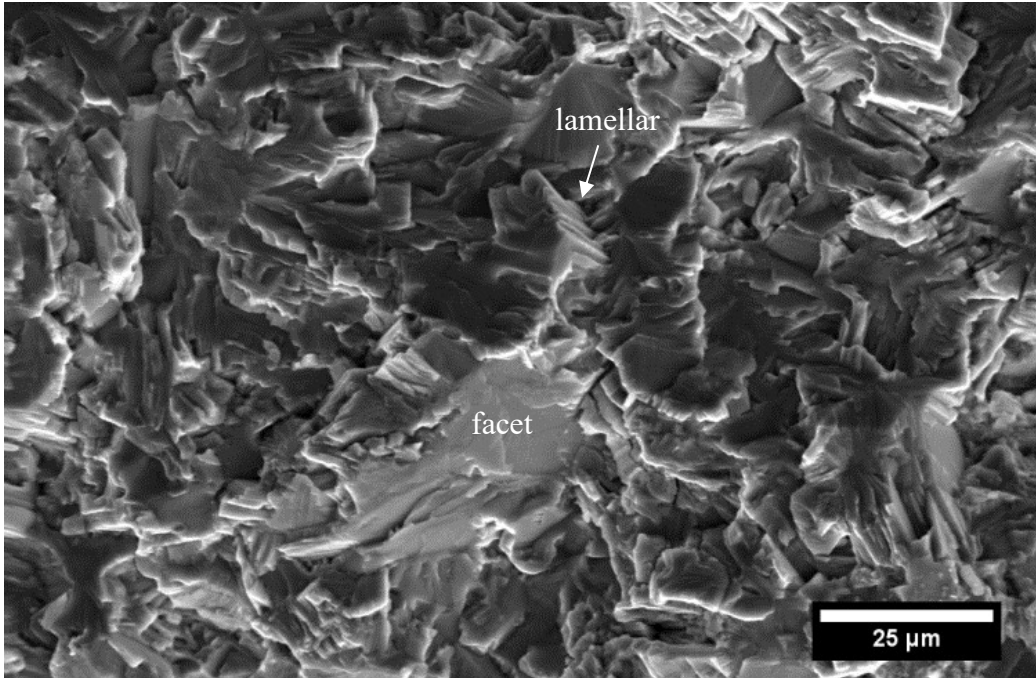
SEM-SE fractography of Sidepress-forged fatigue fracture features in the high  $\Delta K$  regime at  $R = 0.1$ . Crack direction is from top to bottom.
